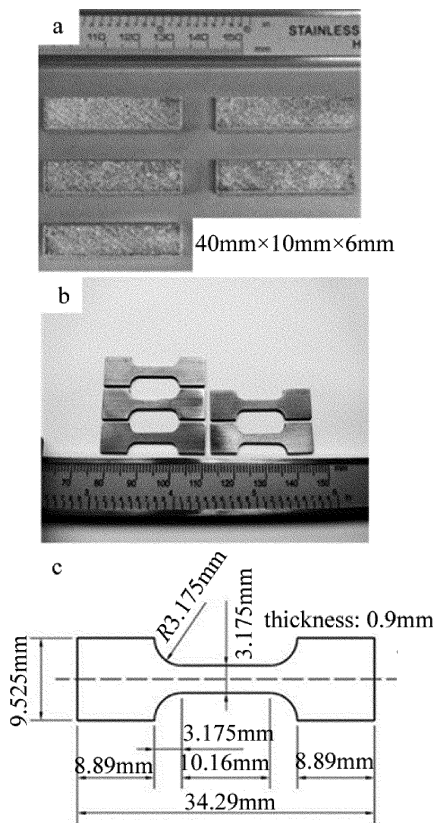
a—multilayer block diagram b—tensile specimen c—dimension of tensile specimen
